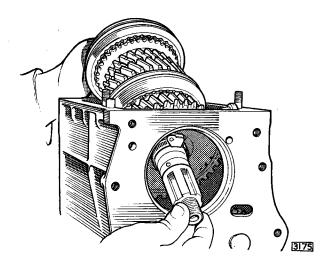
Removal of the mainshaft. Note that the hose clip is fitted to the mainshaft to retain the reverse gear.
